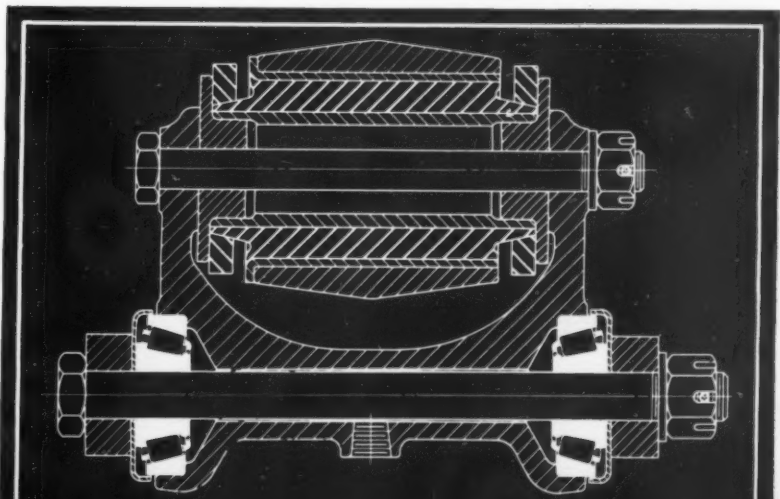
Top—Concave type roller bearings in landing wheel assembly provide live support of load as well as self-alignment
